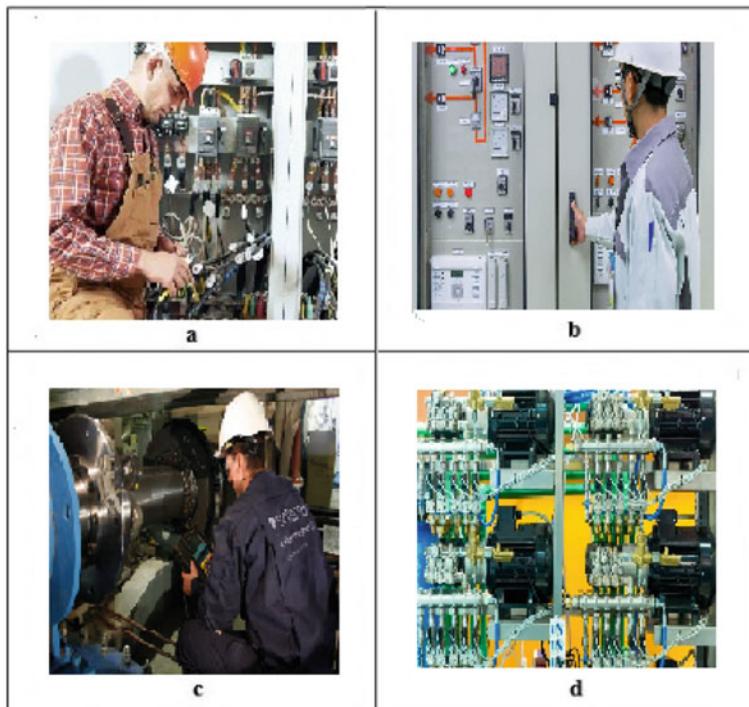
Industrial equipment and machinery used in industries in Mexicali: a industrial electronic equipment and machinery, b industrial electric equipment and machinery, c industrial electromechanical equipment and machinery, d industrial pneumatic equipment and machinery
